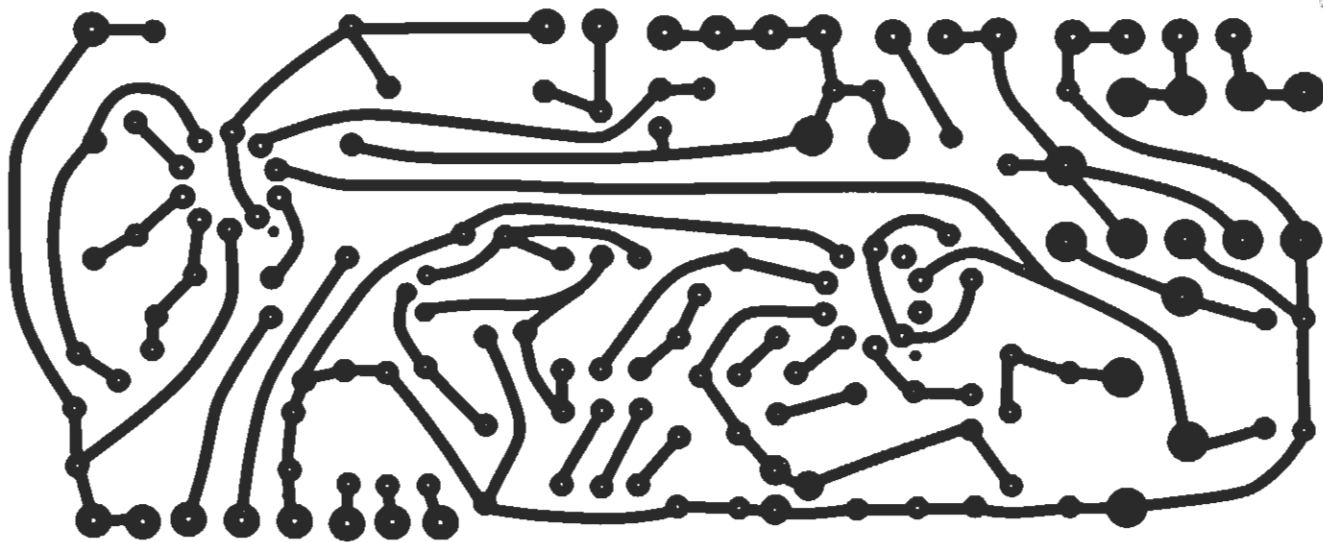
Actual-size etching and drilling guide is shown above; component-placement diagram is at left; table at right details hookups between board and off-the-board components.
